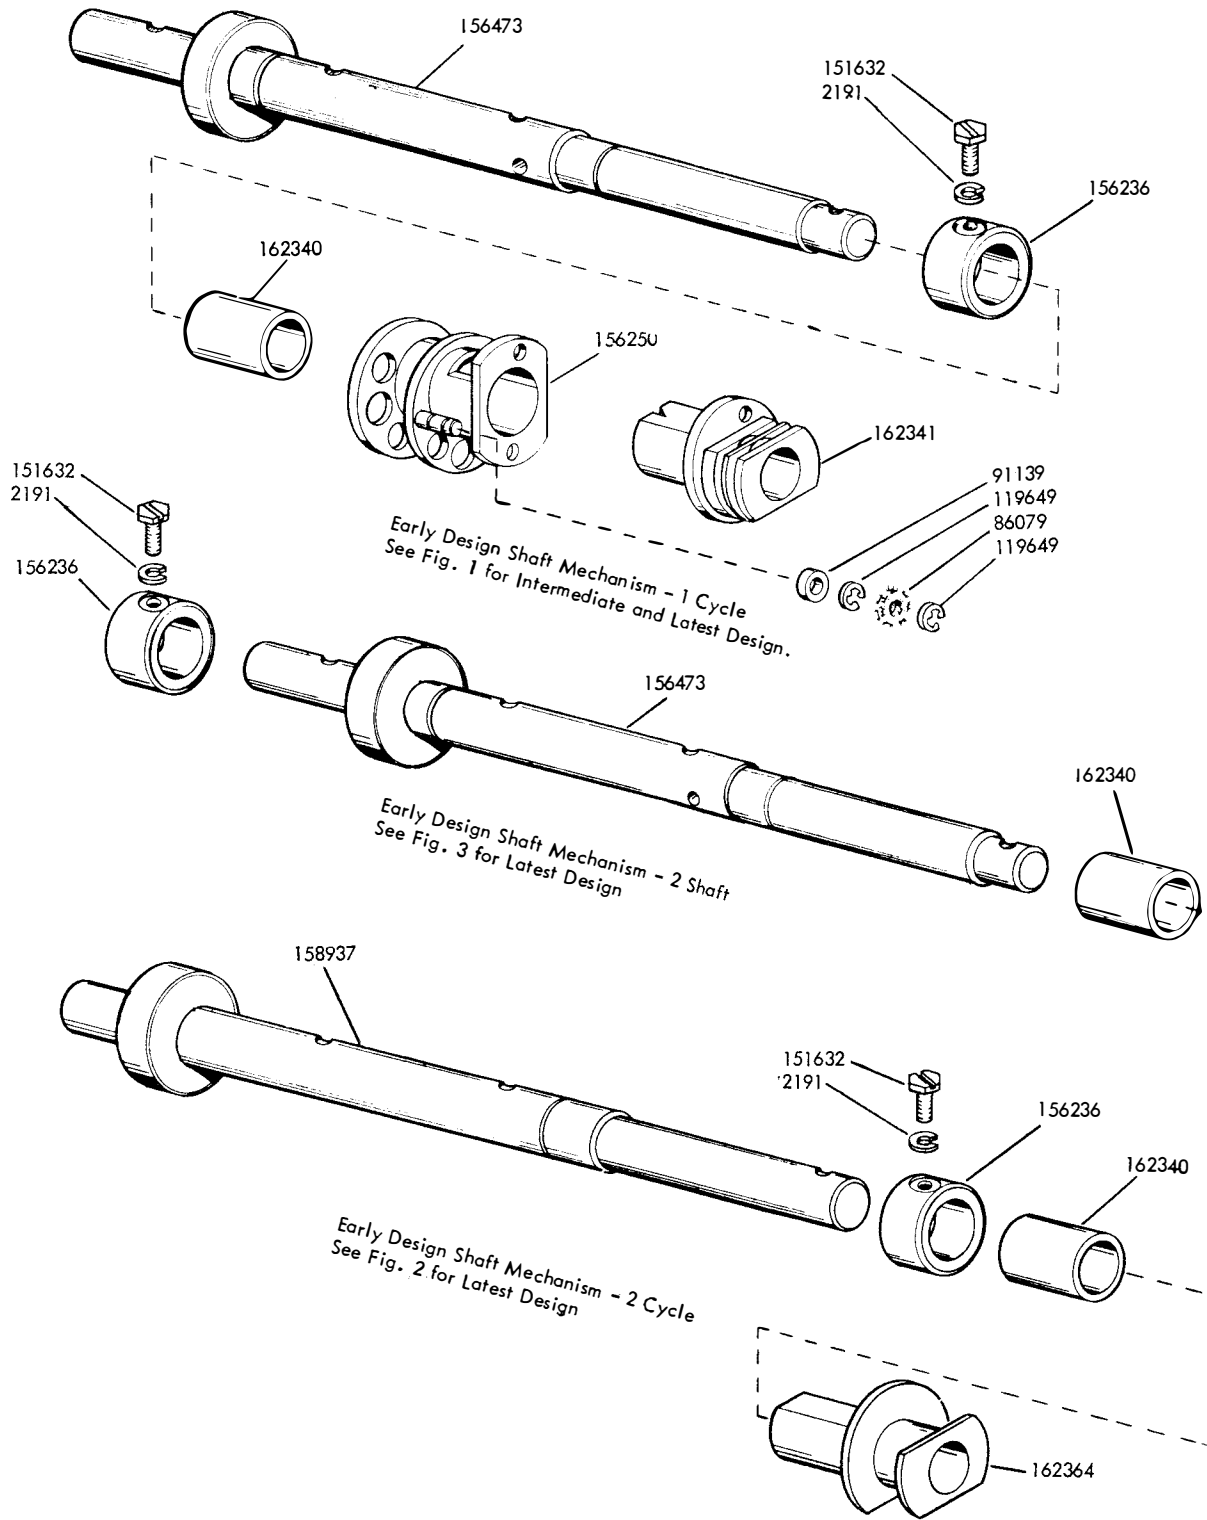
EARLY DESIGN SHAFT MECHANISM FOR 5 LEVEL UNITS
